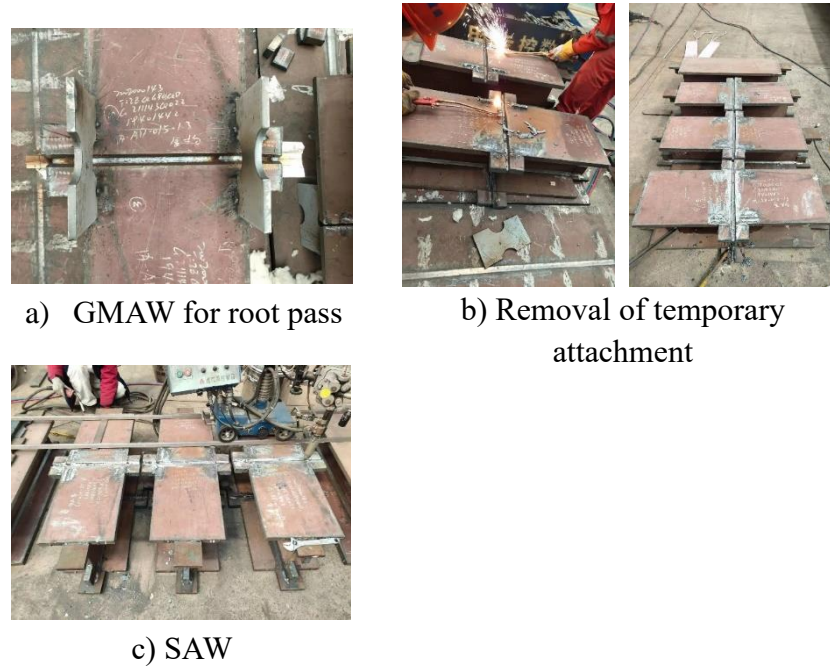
Typical splice welding for a H-column – flange plates
